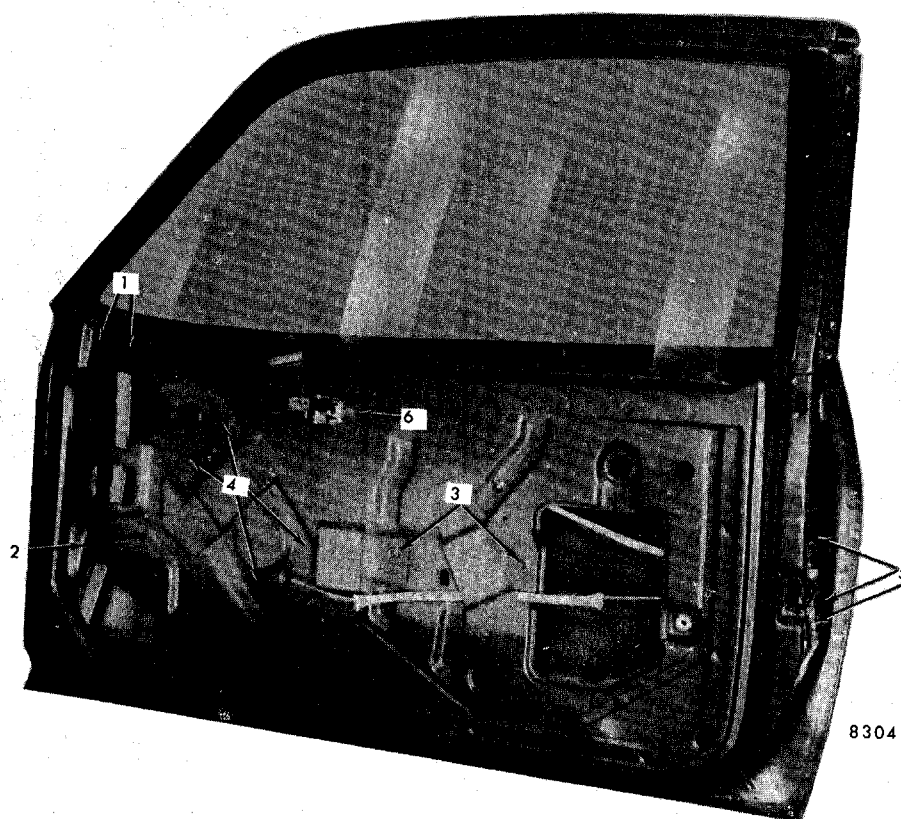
Door Hardware Attachments - "H-07" Styles
